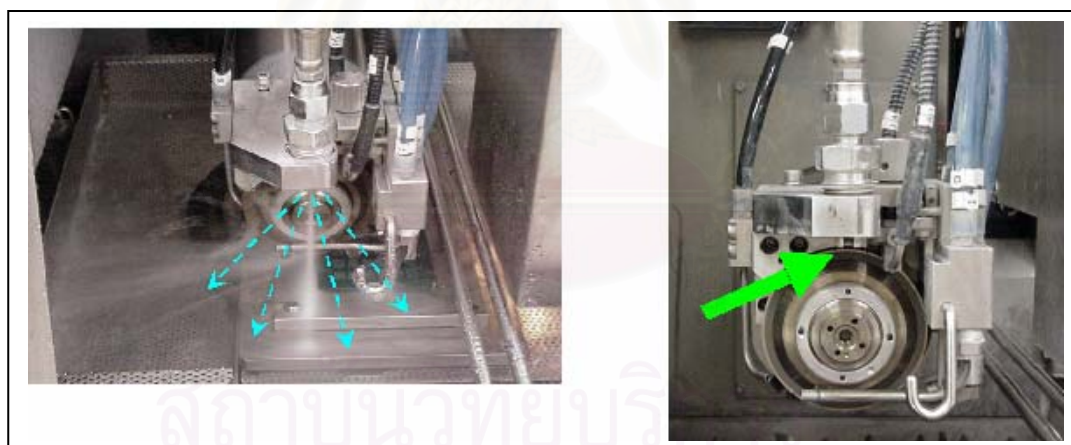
Clogging of Vacuum Holes on Mount Base Jig
